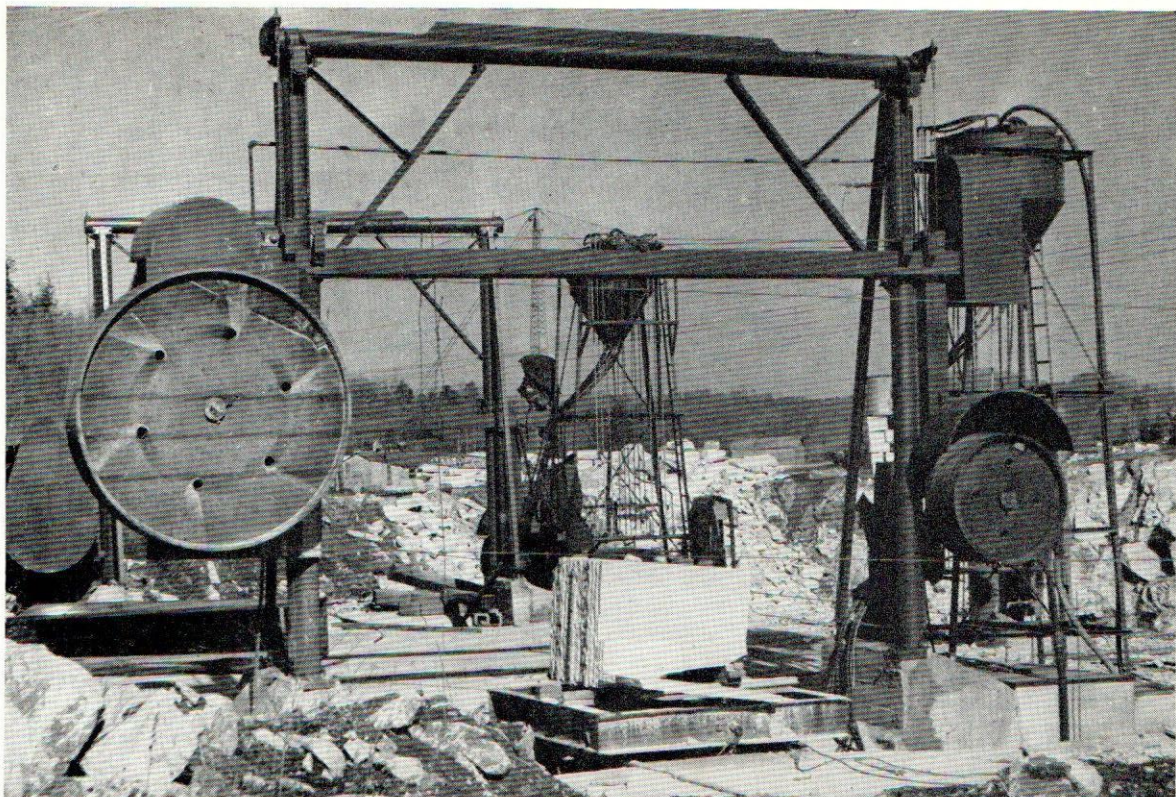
Wire saw used to cut split face marble. (Photo courtesy Ty-Sa-Man Machine Co., Knoxville)
